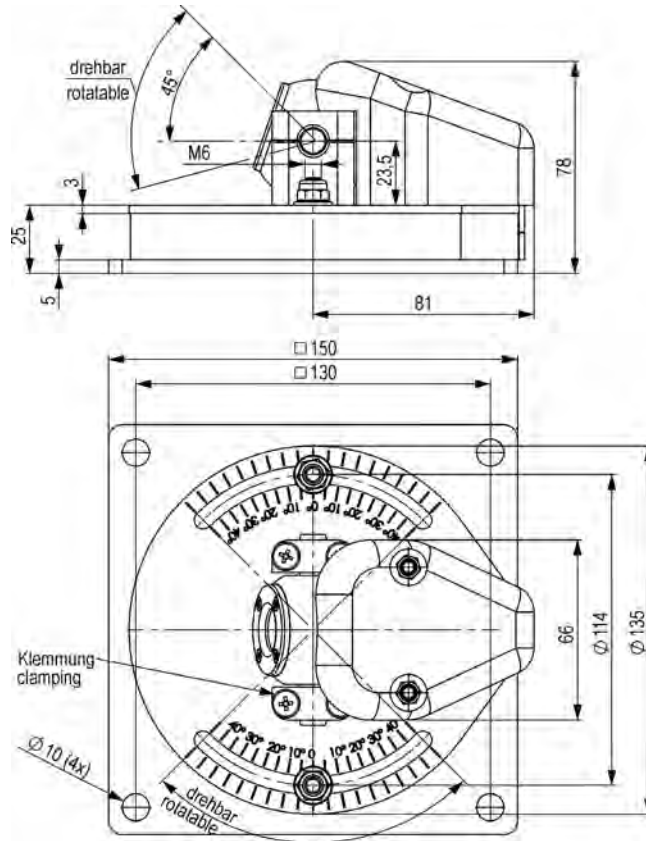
Dimensioned drawing ball head sensor Type NOS-V20BS
